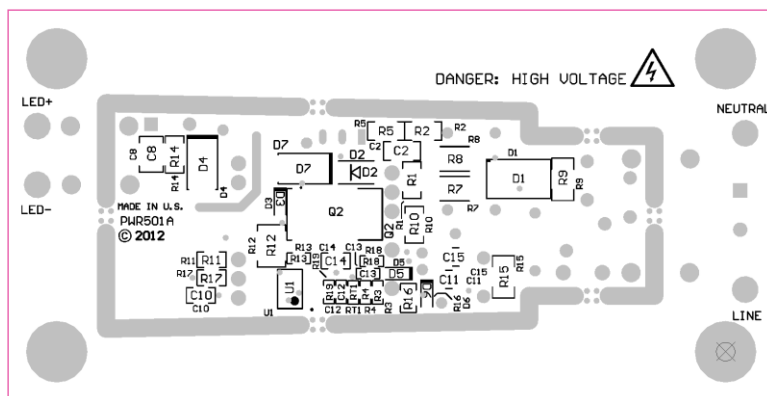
LM3447-PAR-230VEVM Top Assembly Drawing (top view)
